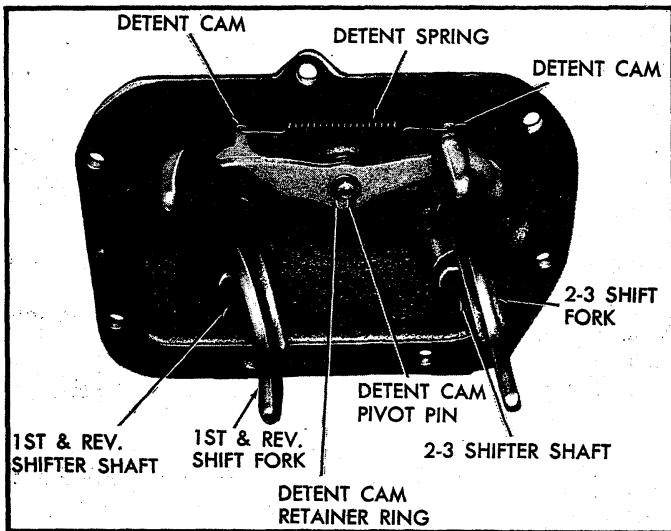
A - Transmission Side Cover, Shift Fork and Detent Assembly
